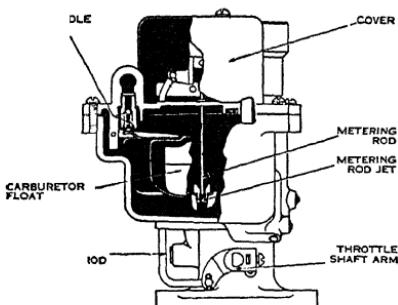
Sectional View of Chevrolet Down-Draft Carburetor from Front
